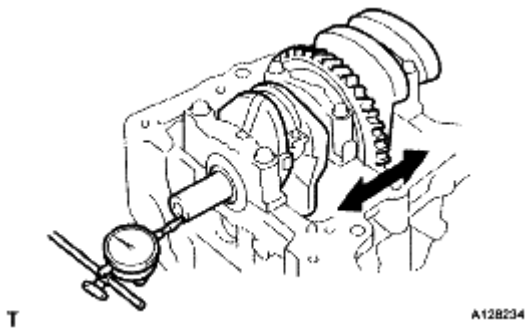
Measuring Thrust Clearance While Prying Crankshaft Back And Forth With Screwdriver
